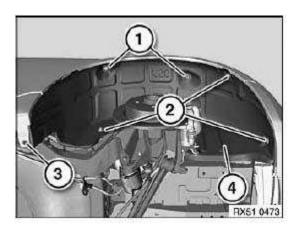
Identifying Screw Rivets And Wheel Arch Cover Courtesy of BMW OF NORTH AMERICA, INC.
